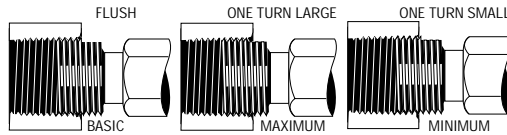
Gaging internal American National Taper pipe threads with working gage. When the internal thread is chamfered, the gaging point shall be the intersection of the chamfer and the pitch cone of the thread.
